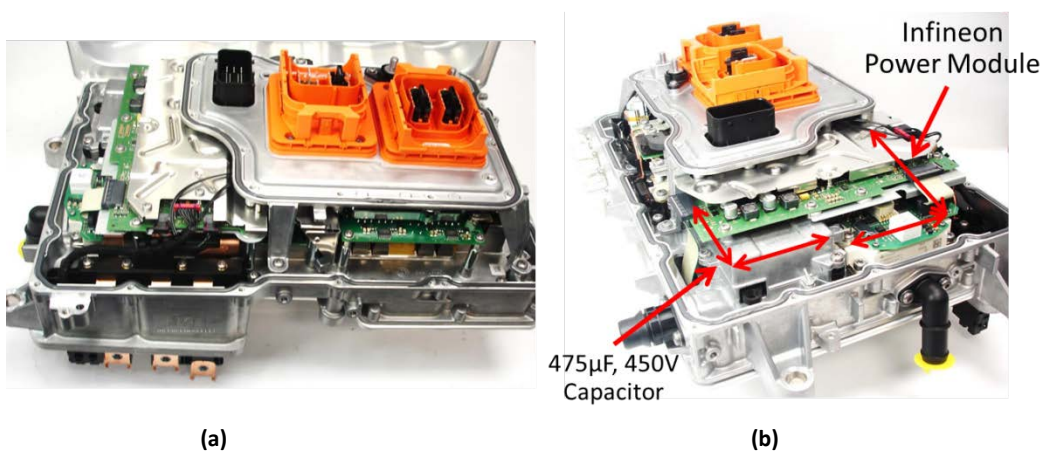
2016 BMW i3 inverter assembly with top cover removed: (a) front and (b) side.
